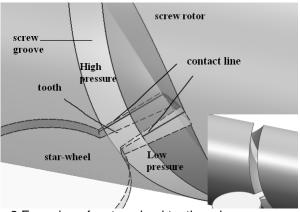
Engaging of a star-wheel tooth and a screw groove
